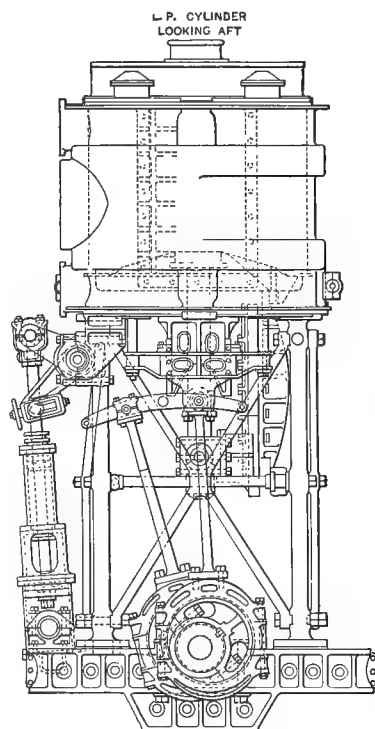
End view of triple-expansion engine. U. S. Navy.
